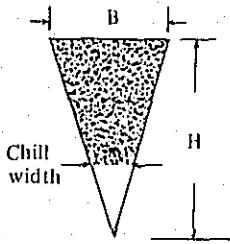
Chill test casting showing appearance of fractured surface
